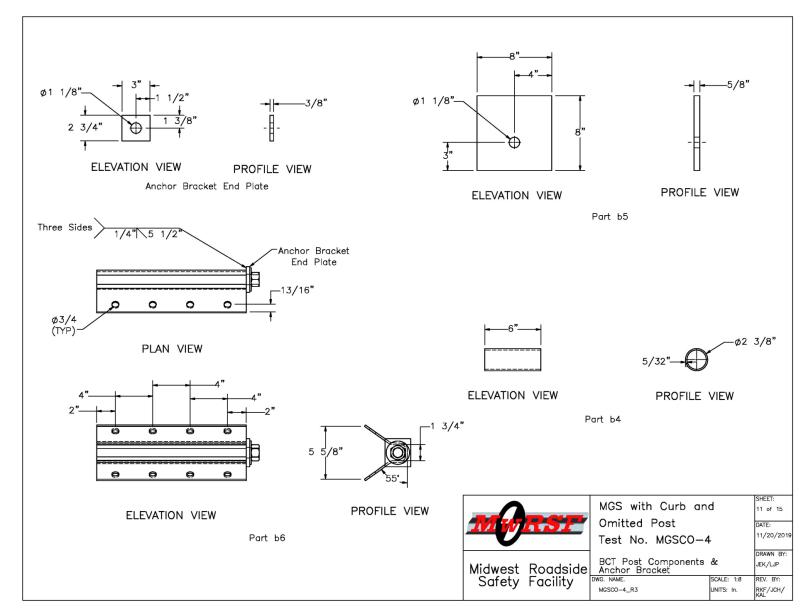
MGS BCT Post Components and Anchor Bracket, Test No. MGSCO-4
